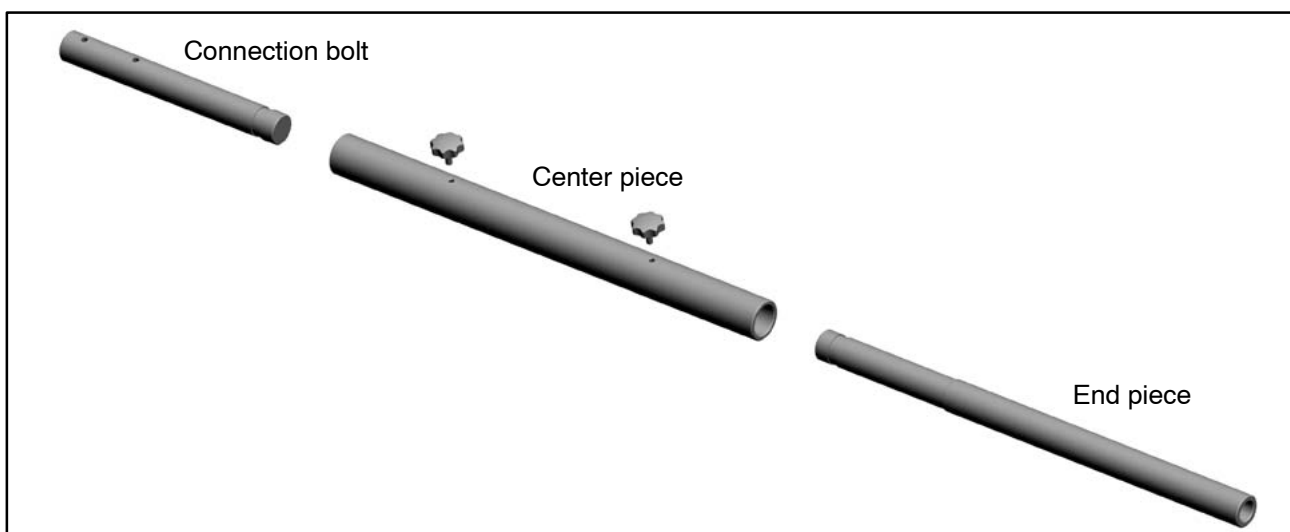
Three-piece lever (500 N·m, 1 kN·m)
